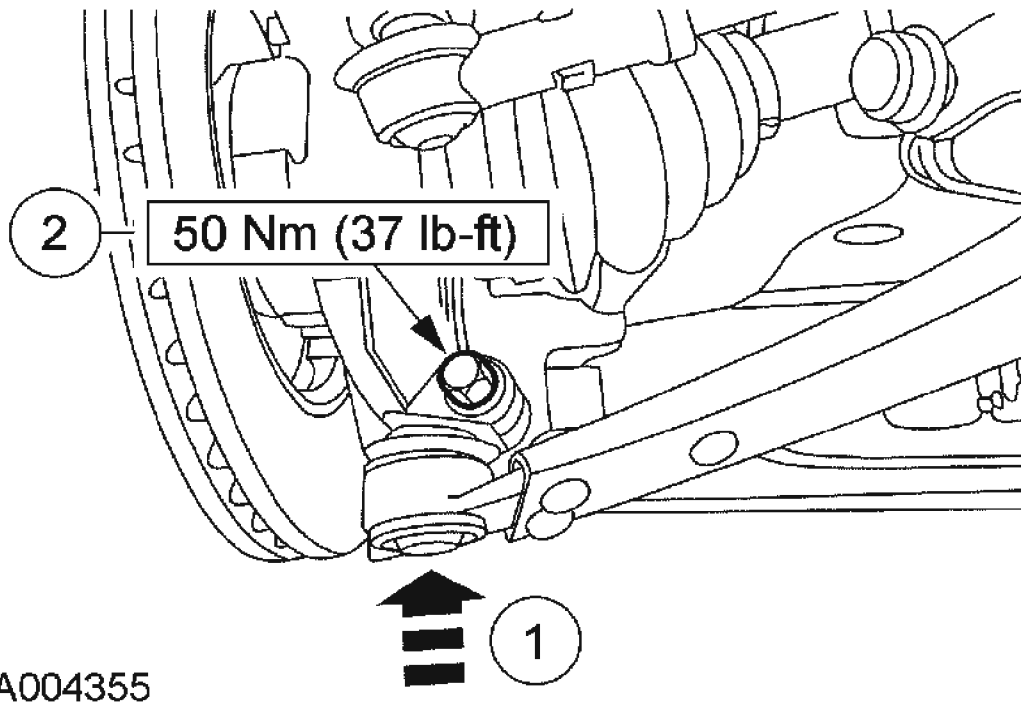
Installing Both Of Lower Control Arms To Knuckles
